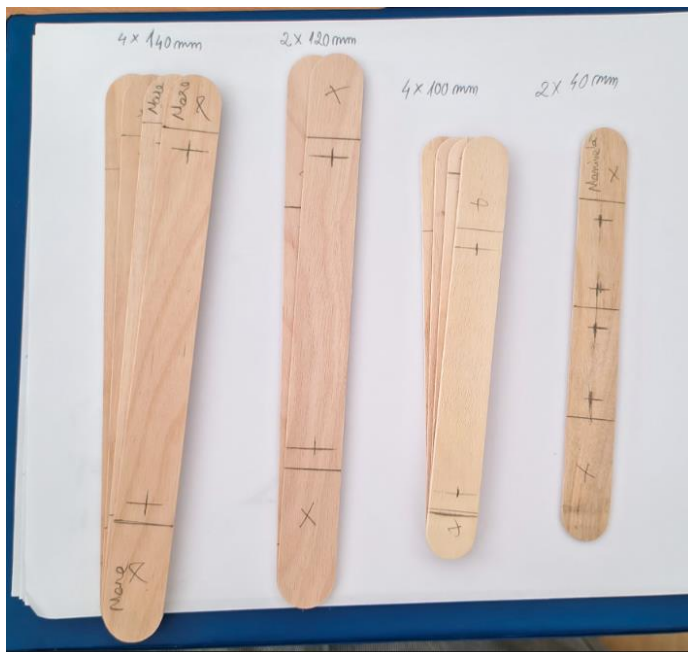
Testing dimensions directly in the shop and assembling the mechanism
